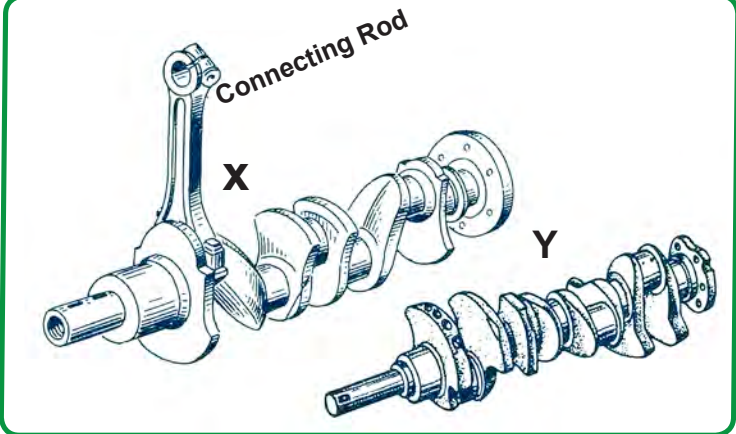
X.-Is a four-cylinder crankshaft with a connecting rod attached. Y.-Is a V-8 crankshaft.
